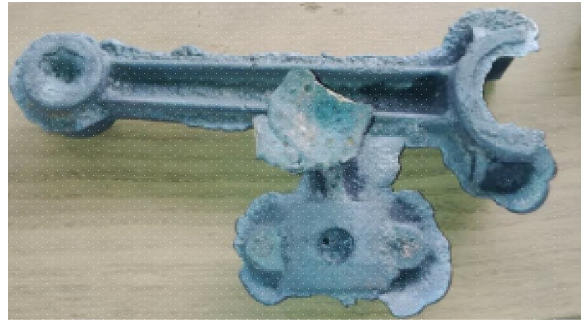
Connecting Rod and Cap Produced by Lost Wax Casting before Machining
